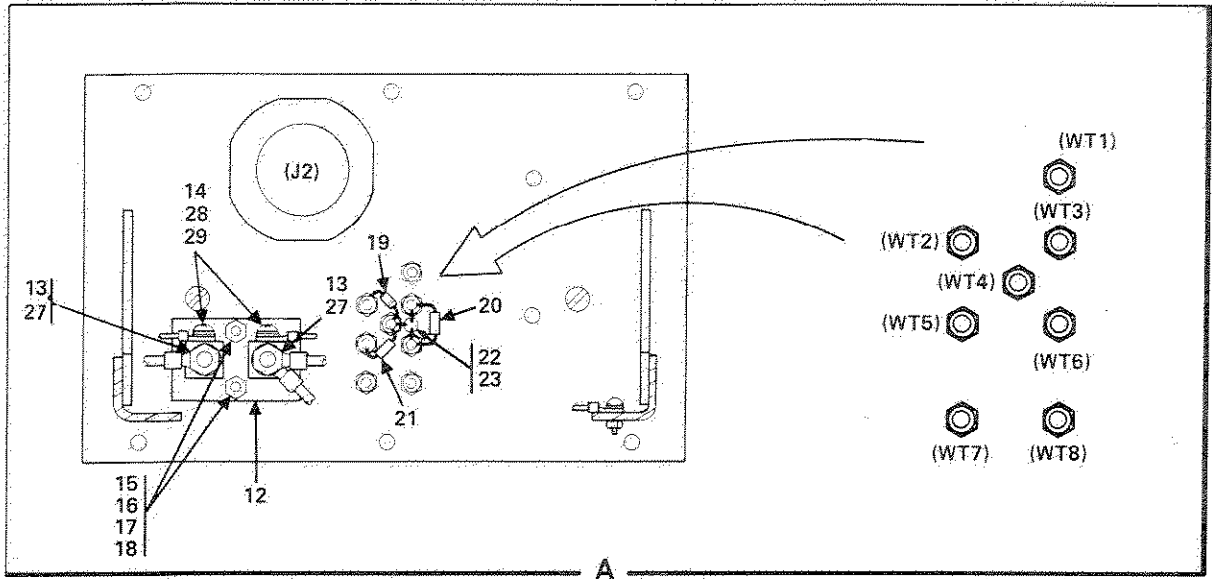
+5 V Dc Power Supply Assembly (7343912G1)
